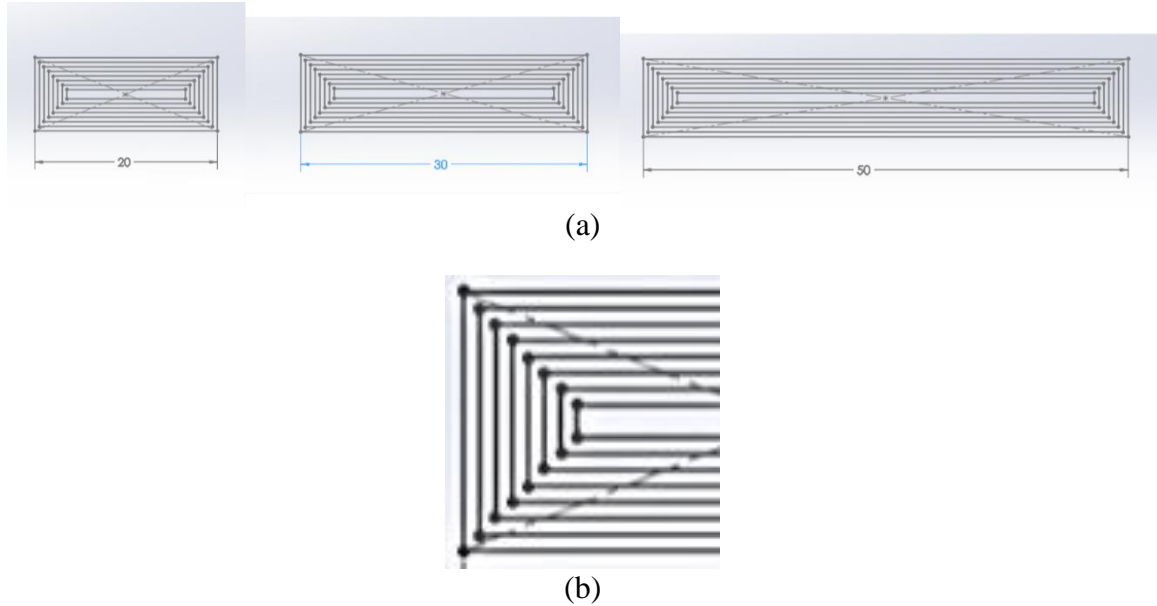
(a) Top view of printed toolpaths for 20mm, 30mm, and 50mm samples; (b) Close-up view of toolpath on one end of sample
